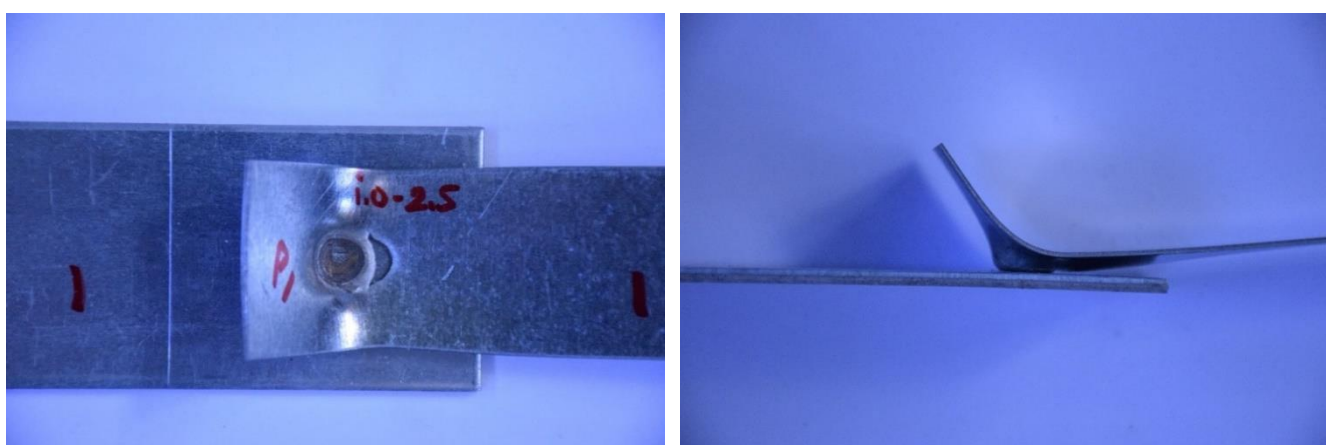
Failure mode of SW-1.0-2.5 specimens
